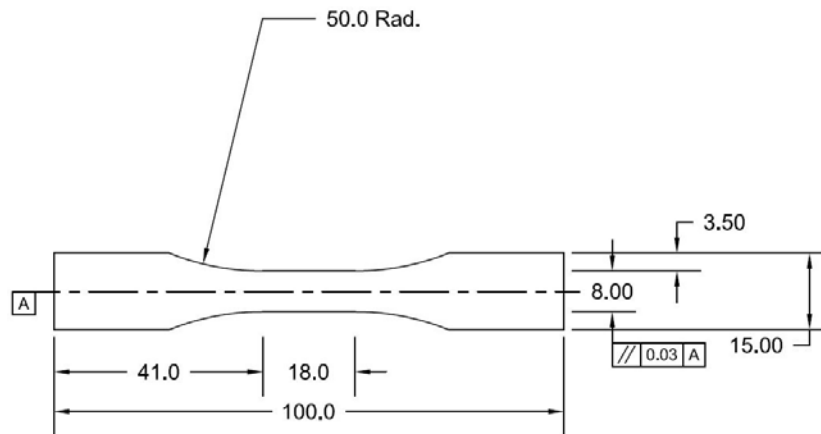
Dogbone-shaped specimen (all dimensions in mm)
